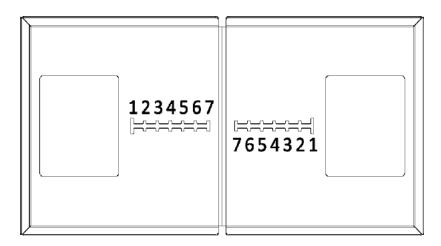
Marking the position of the shutters holders in the deflector assembly (1 - fully closed, 7 - fully open)
